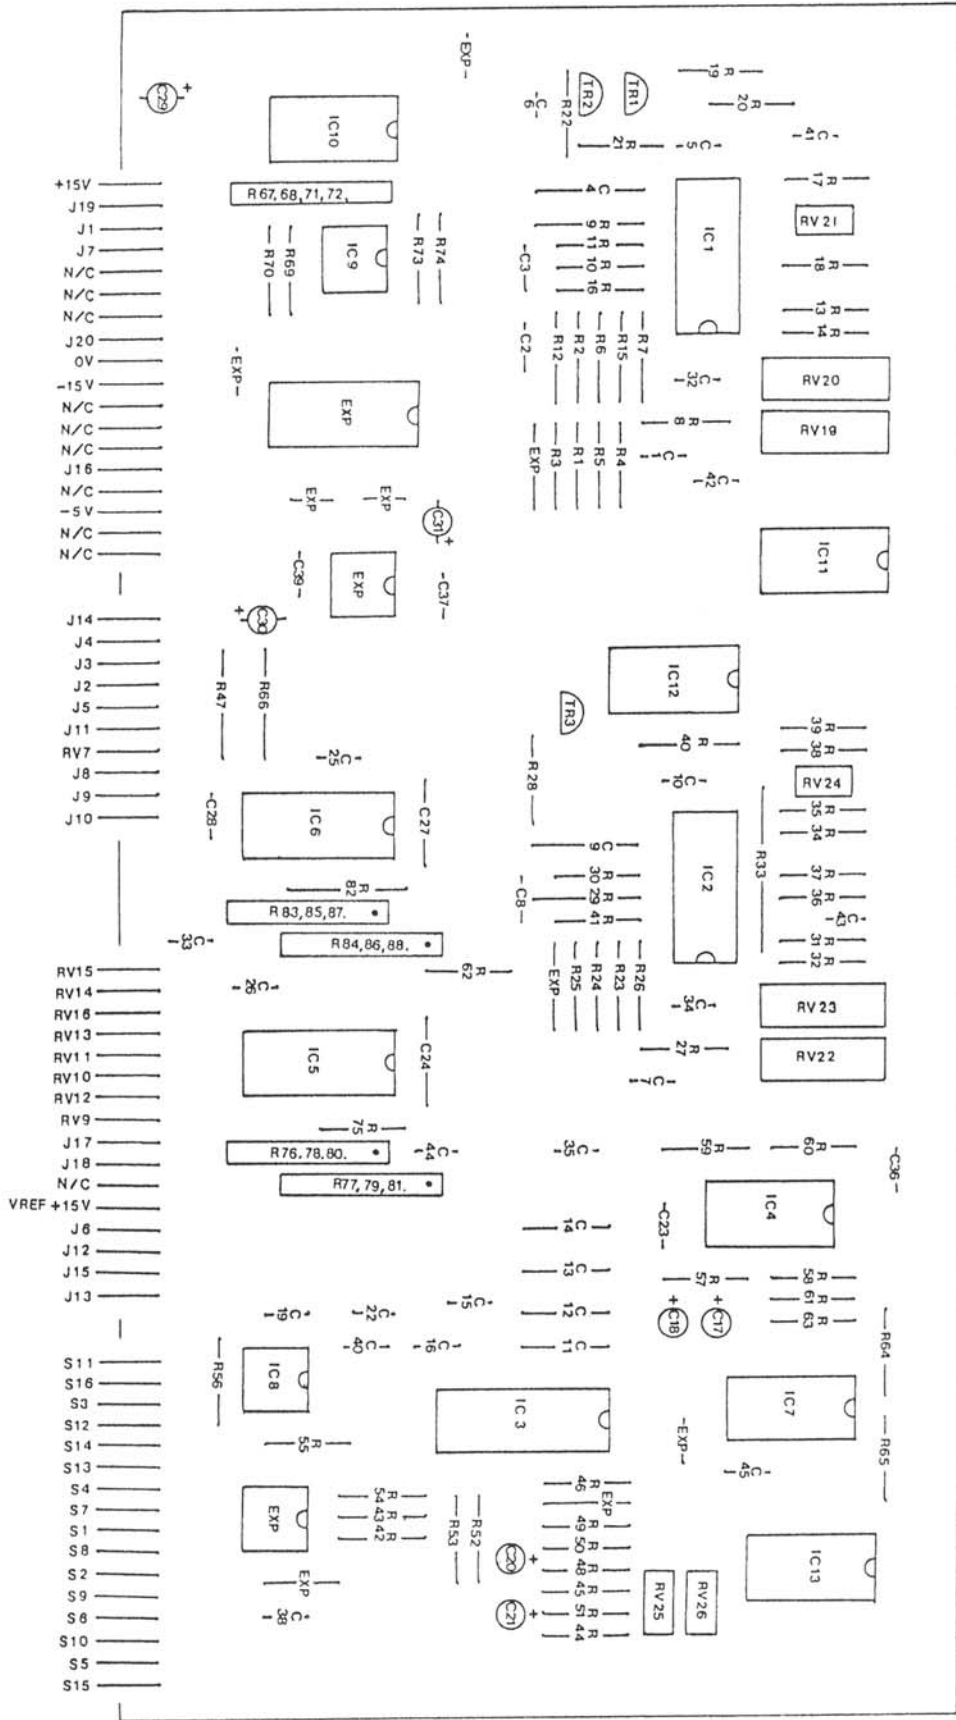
80-C9 PCB COMPONENT LAY-OUT
